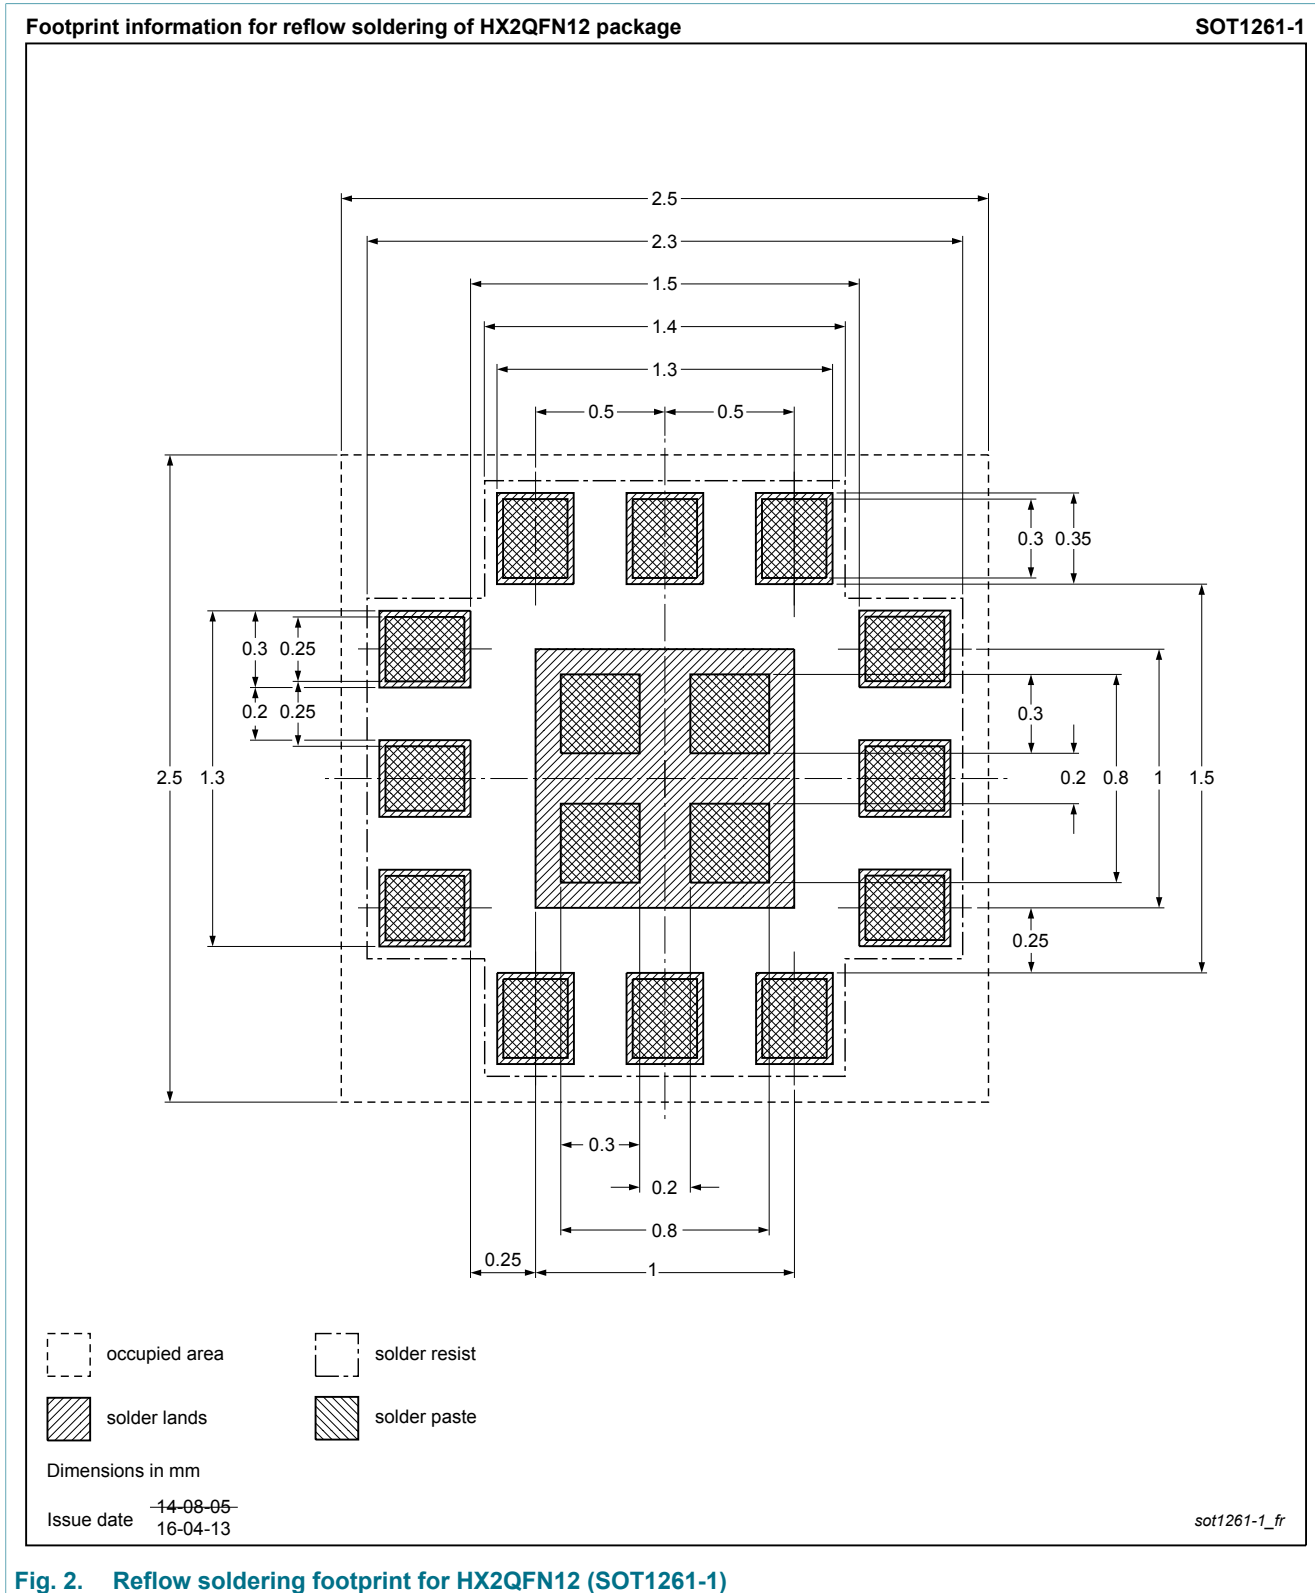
Reflow soldering footprint for HX2QFN12 (SOT1261-1)
